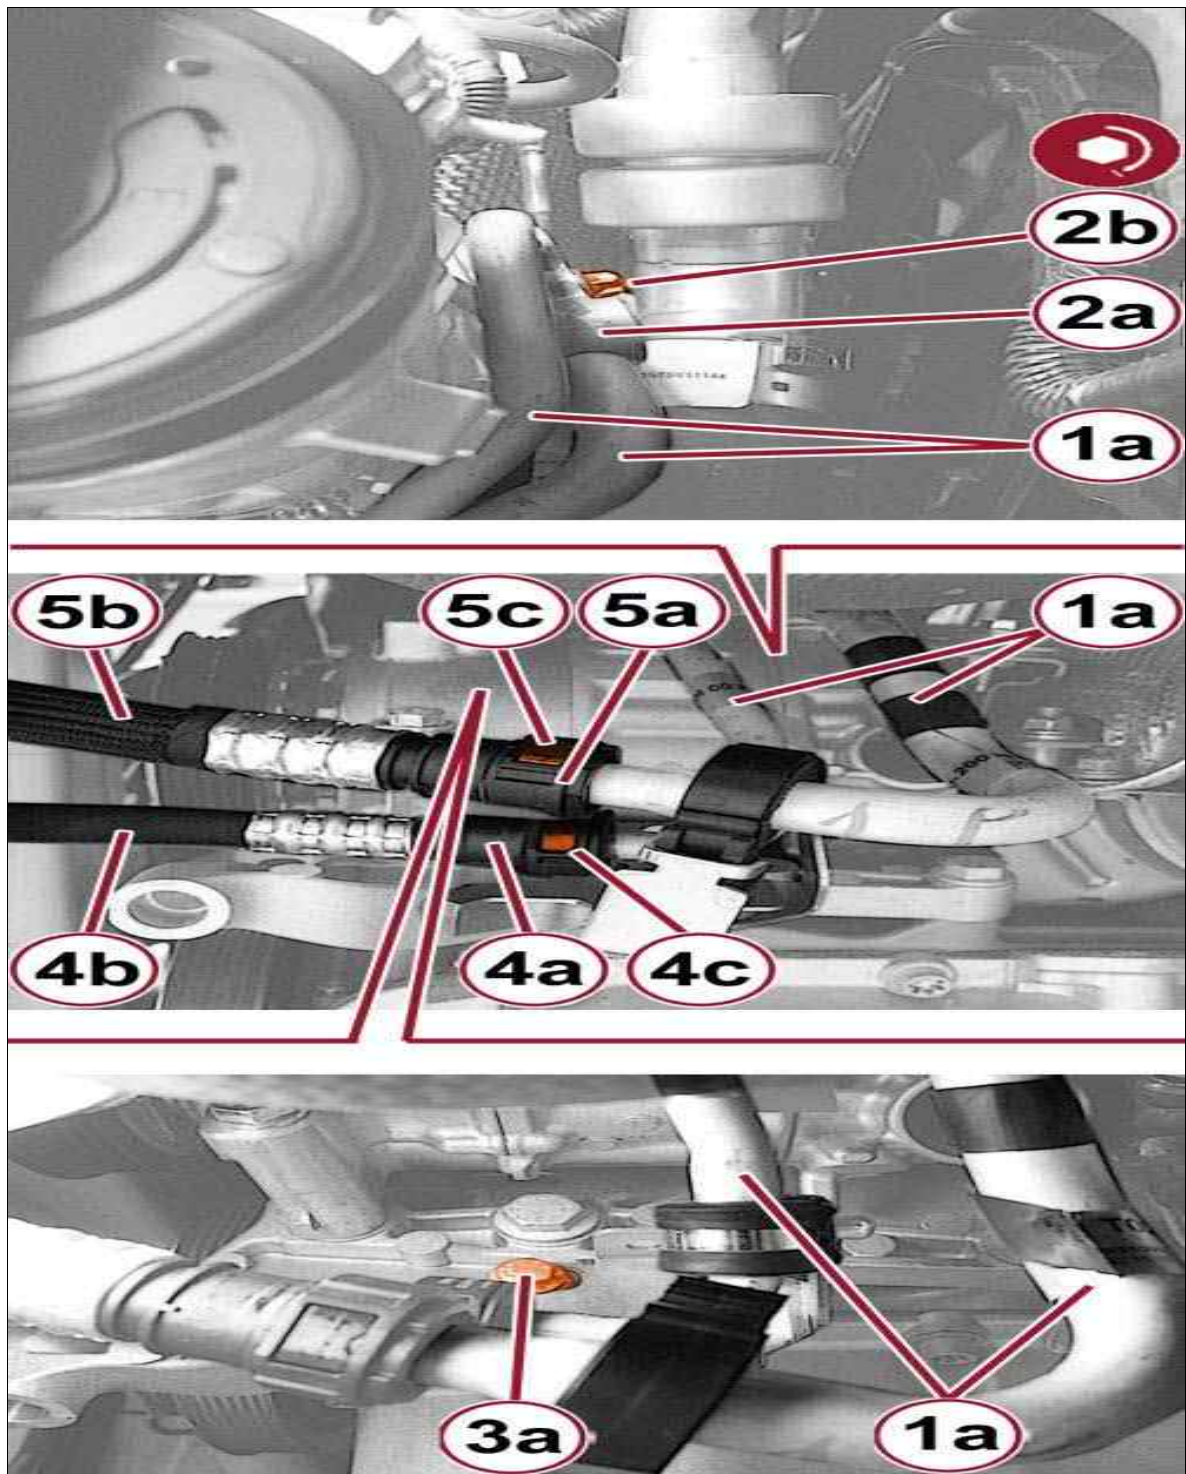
Compressor, Hose, Retaining Clip & Coupling
